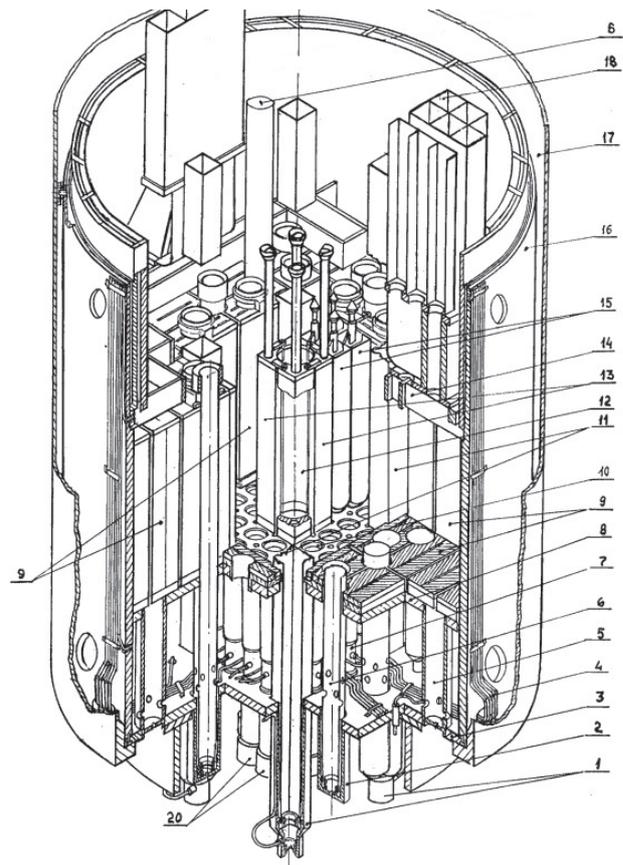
SM-3 reactor core: 1 – shim rod tube sockets; 2 – automatic controller tube socket; 3 – support grid lower plate; 4 – cladding integrity monitoring tube; 5 – support grid rack; 6 – automatic controller tube; 7 – FA sockets; 8 – support grid upper plate; 9 – beryllium blocks; 10 – FA sockets; 11 – cladding integrity monitoring tubes; 12 – central trap; 13 – CTTA beryllium inserts; 14 – reflector hold-down grid; 15 – working FA; 16 – vessel; 17 – reactor vessel shield; 18 – FA storage No. 1.
